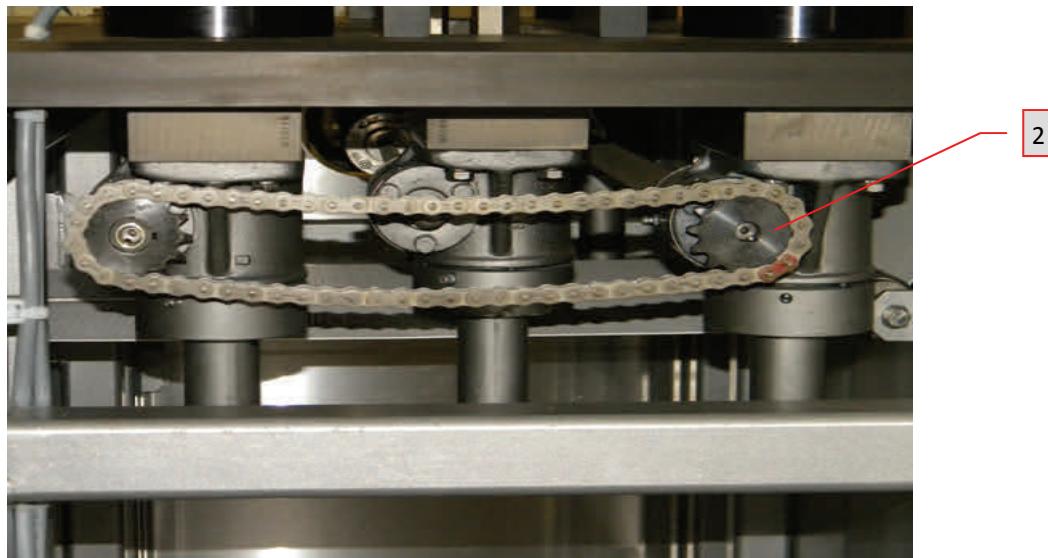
Detail of Jack Screw Mechanism in Cabinet
